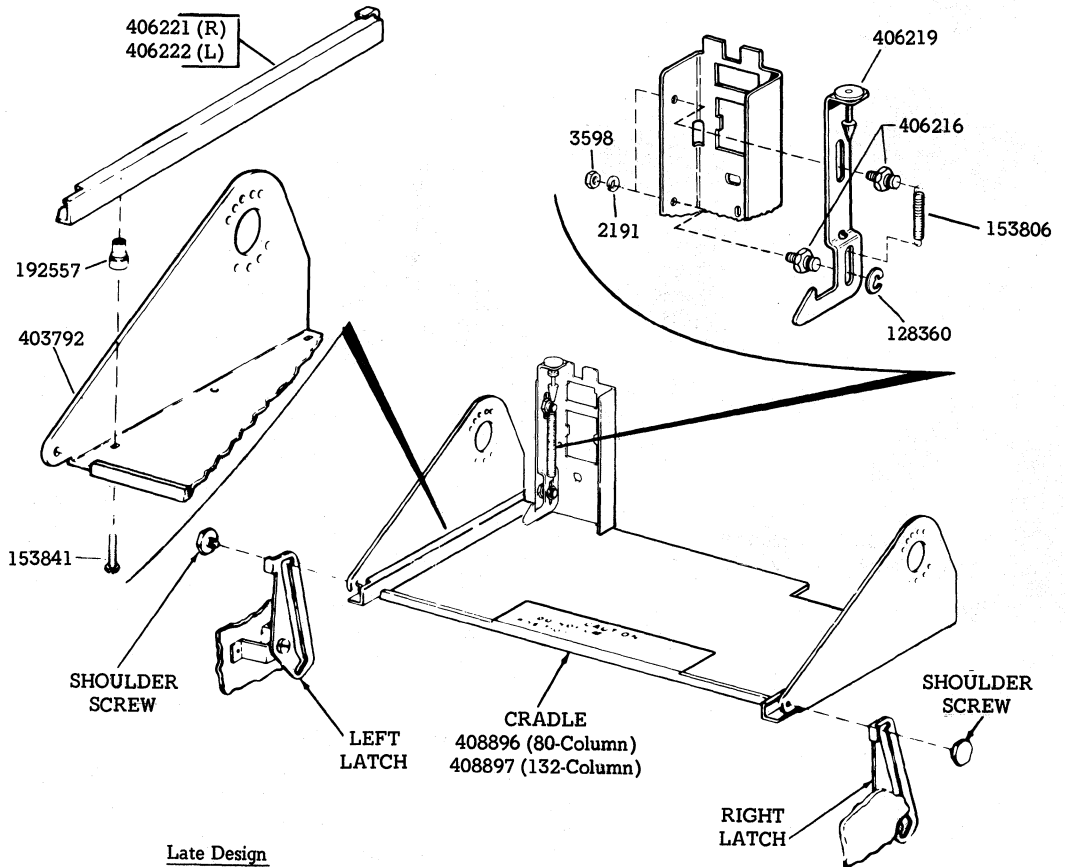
Cradle and Latch Mechanism for Adjacent or RO Tractor Feed Printer
